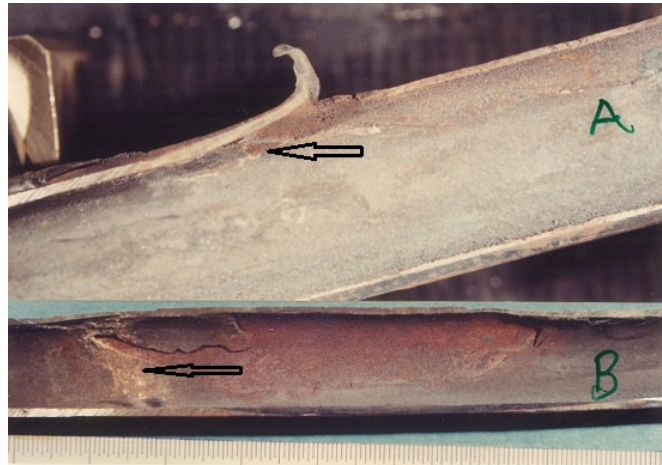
Corrosion seen on internal surfaces (arrowed examples) of failed zone.
